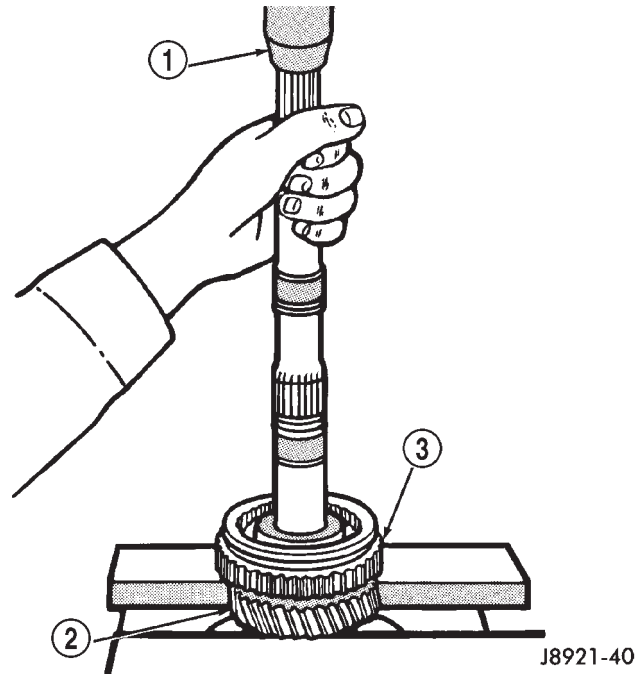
Remove Second Gear, Reverse Gear, And 1-2 Synchronizer
